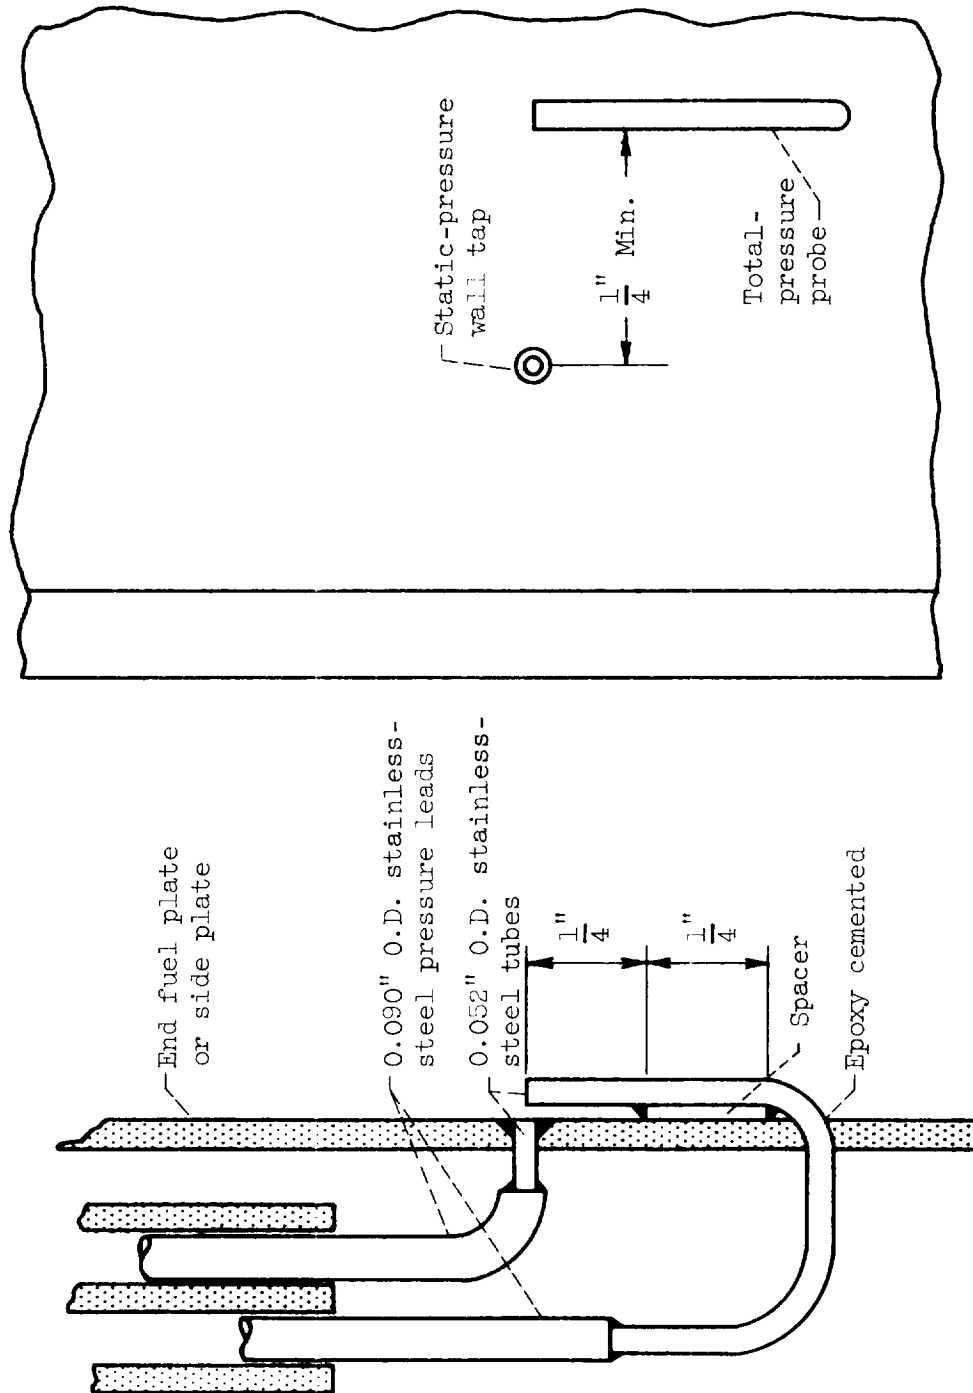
Typical total-pressure probe and static-pressure tap on outer surfaces of fuel assemblies.
